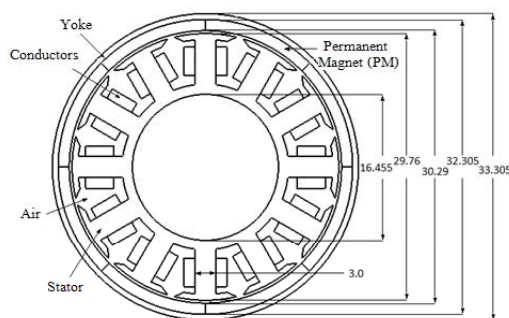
Detail of the tested spindle motor with dimension (mm)
